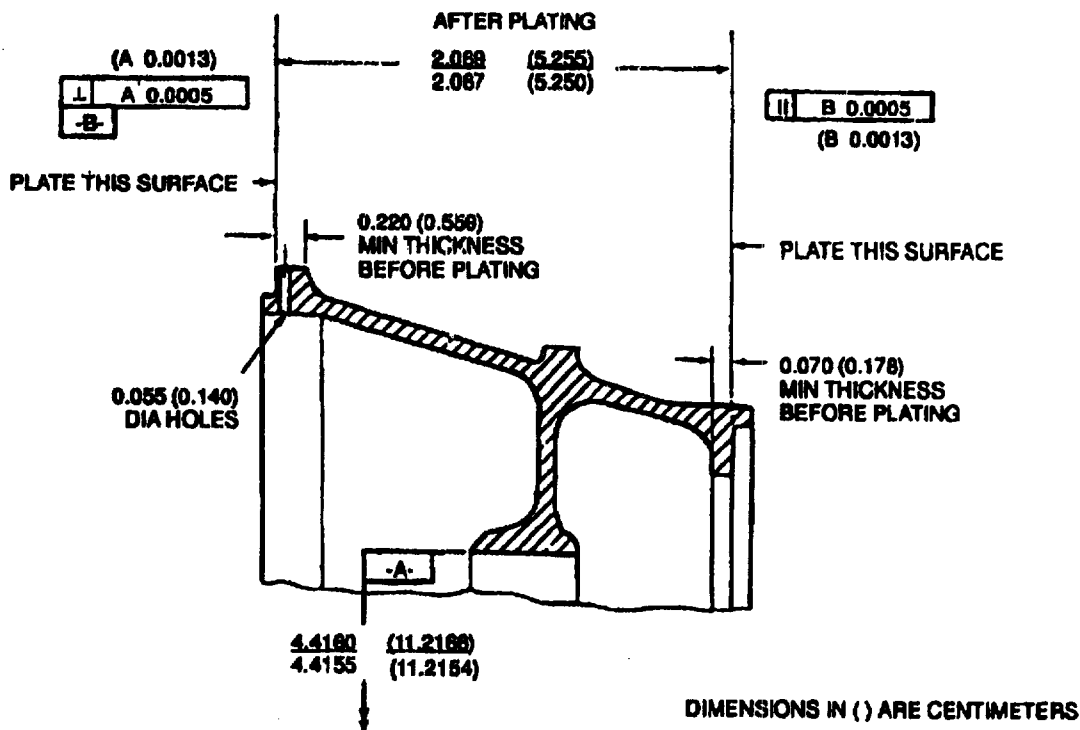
Fifth Stage Compressor Rotor Spacer - Parallelism Repair.
